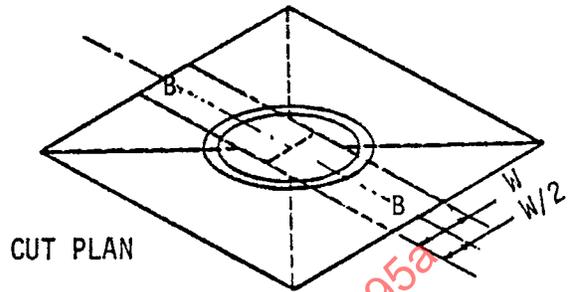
Blank location for bend specimens in fillet-welded sheet.
